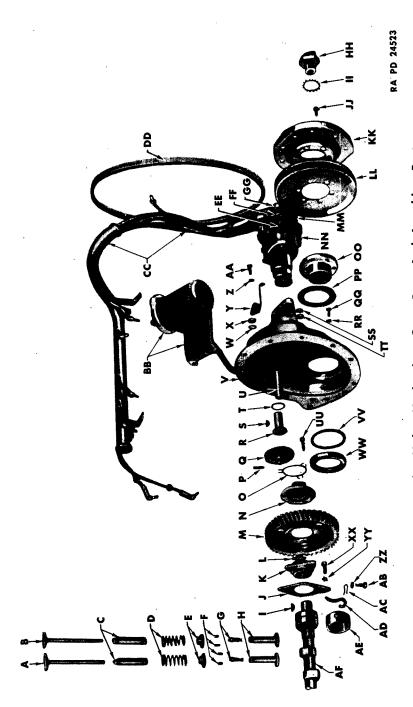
Engine Valve Mechanism, Gear Case And Attaching Parts (Multiple Water Pump Type), Partially Exploded
